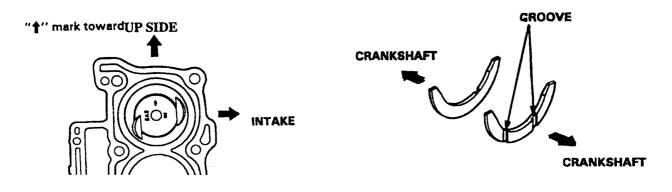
Piston Markings Fig. 25-27. Crankshaft Thrust Washers After installation of the piston and connecting-rod assemblies, install the crankshaft bearings, crank-shaft and thrust washers. The thrust washers must be installed with their grooves towards the crankshaft (Fig. 25-27). Oil all parts before fitting.
